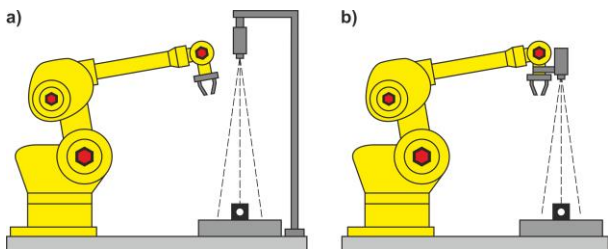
Vision camera mounting methods: a) fixed bracket oriented relative to the global coordinate system of the robot, b) mounting on the robot wrist
